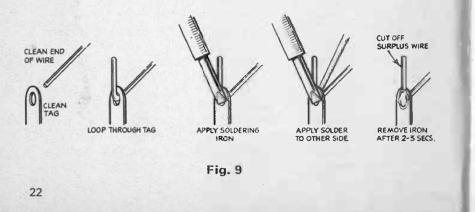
shows the stages in successful soldering. In this example a lead is being soldered to a connecting tag. The same steps apply to any soldered joint in an electrical circuit.
